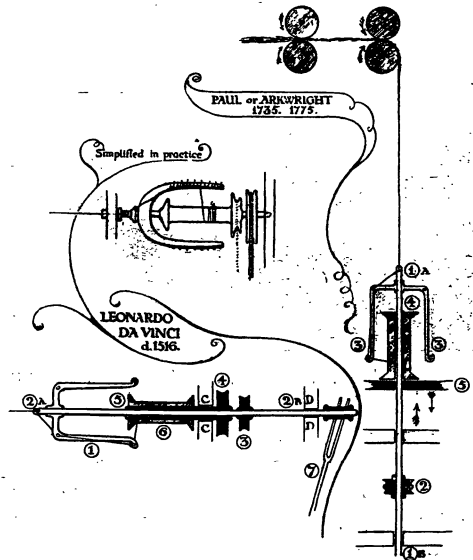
FIRST DRAWING OF BOBBIN AND THEIR ATTACHMENT FOR SPINNING-WHEELS.
